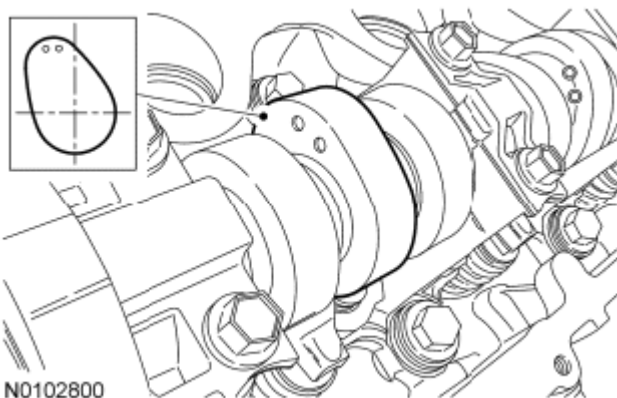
Identifying No. 5 Cylinder Camshaft Exhaust Lobe
